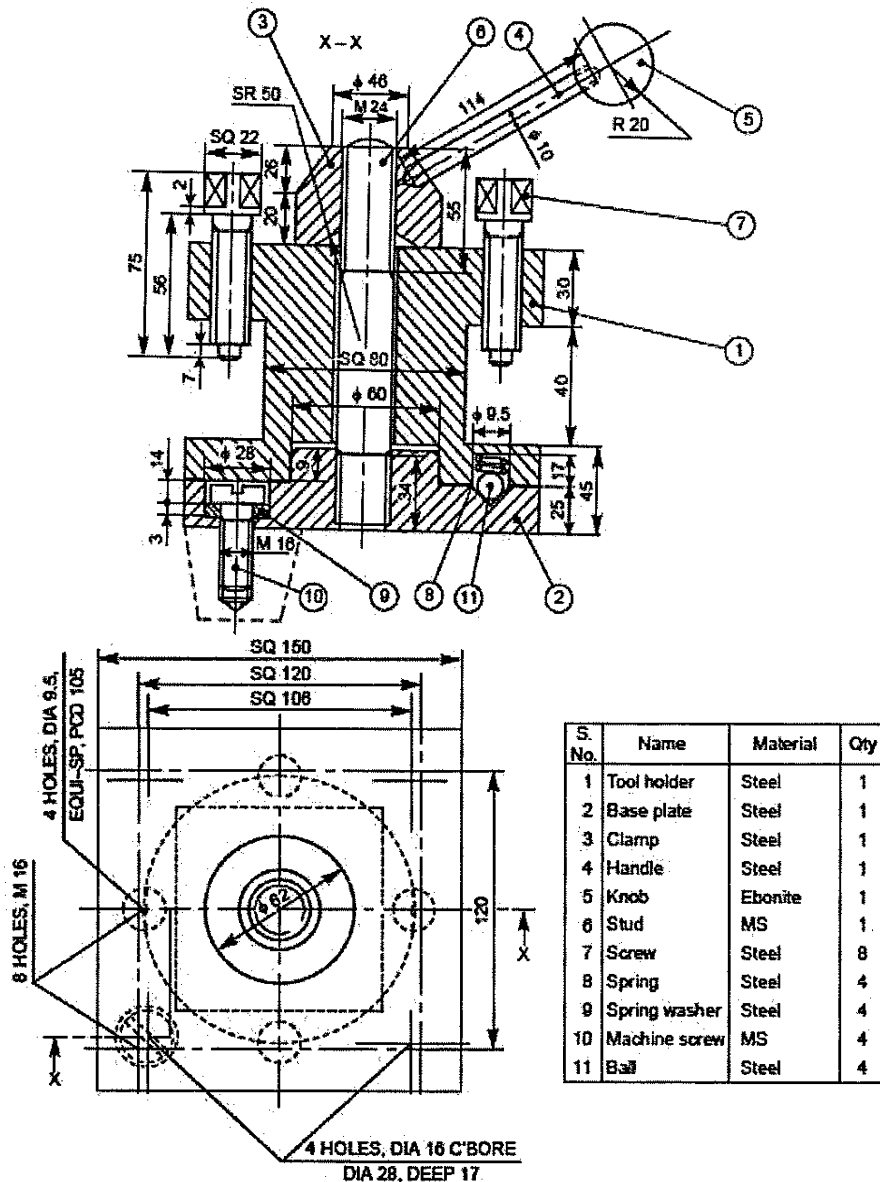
Assembly drawing of 'SQUARE TOOL POST'
